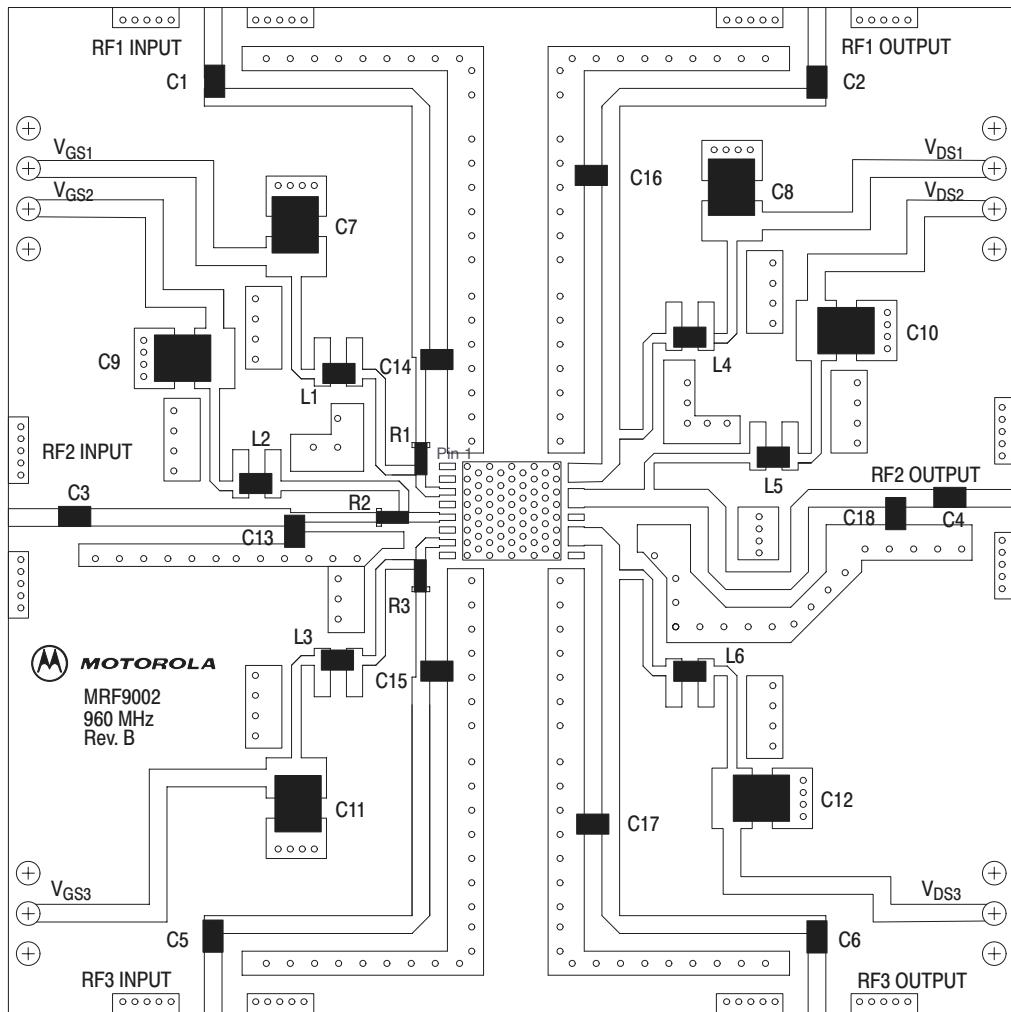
MRF9002R2 Broadband Test Circuit Component Layout
